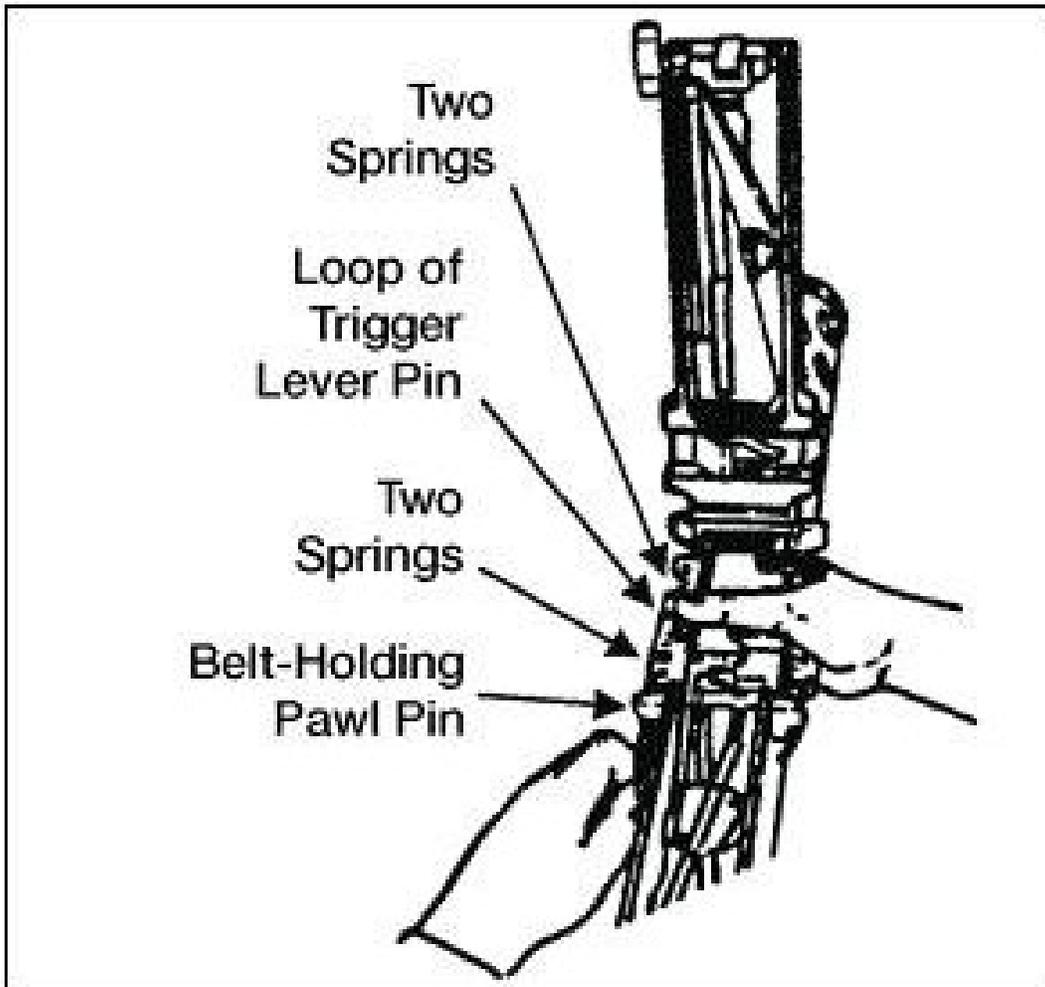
ST-1025_21 (Removal of the belt holding pawl pin, assembly, and springs)
